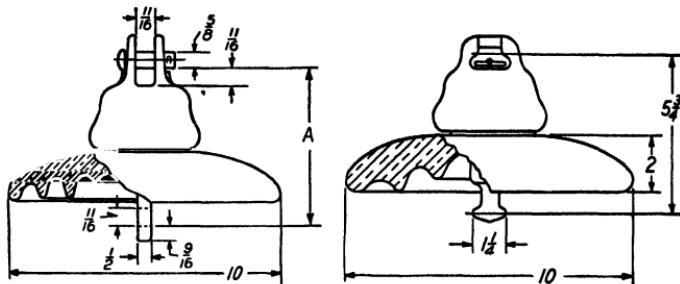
Suspension-type insulators. (Courtesy of Westinghouse Electric & Manufacturing Co.)
